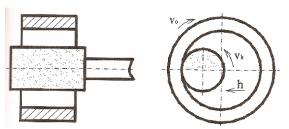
Grinding of inside rotary surfaces by necking contrarotary way with radially in-feed [⁹]
